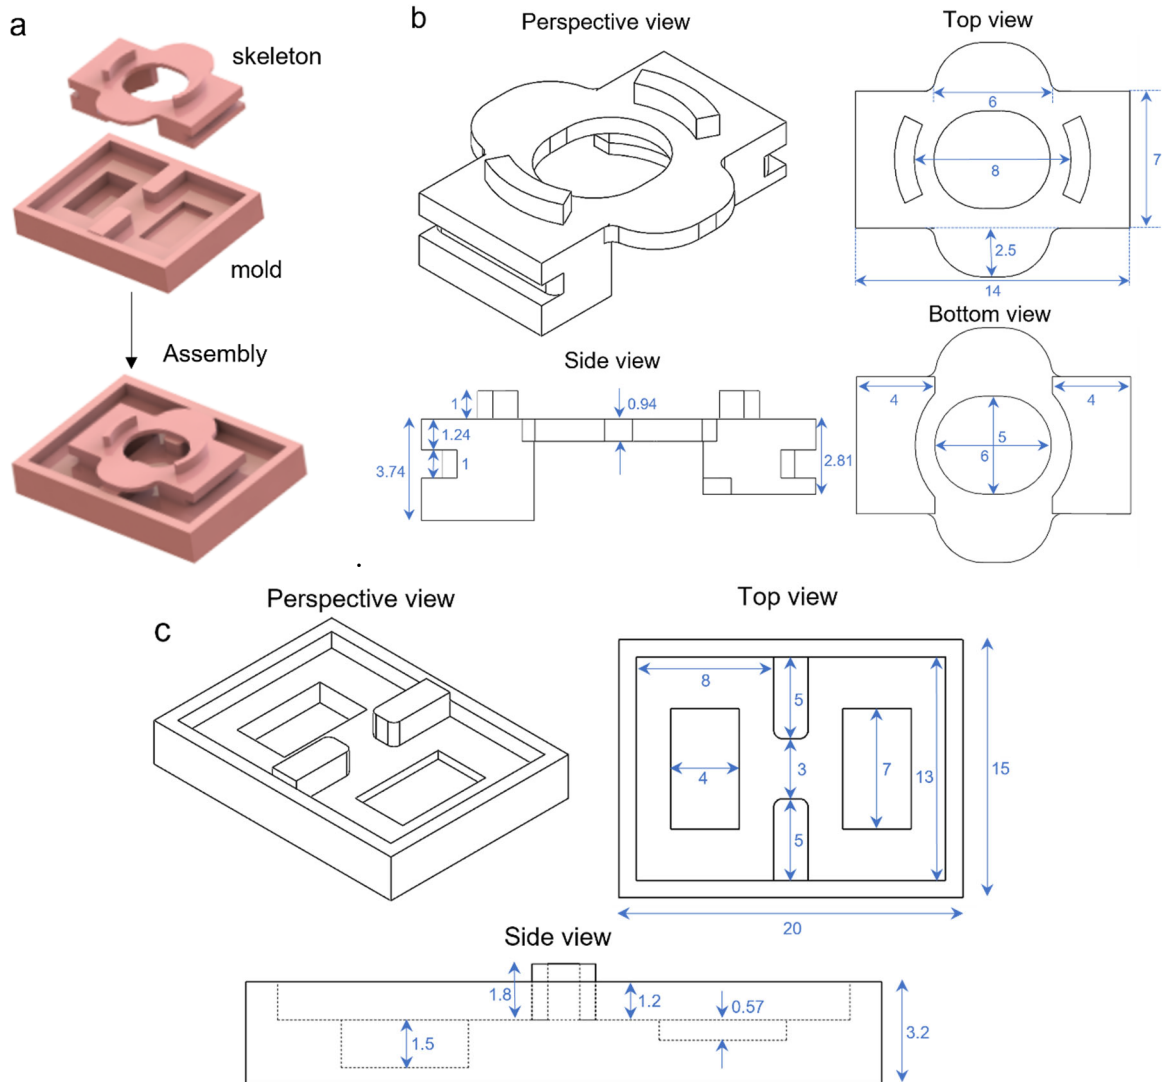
Designs of 3D printed hydrogel structures for eBiobot. (a) Assembly of 3D printed skeleton and mold for eBiobot. CAD with dimensions of the final optimized generation (4th) of (b) eBiobot skeleton and (c) its tissue seeding mold. The red circle in (b) indicates the inner radius of wireless optogenetics device. The width (3.5 mm) of central part in mold was considered to match with illuminations area of μ -ILEDs. Unit: mm.
